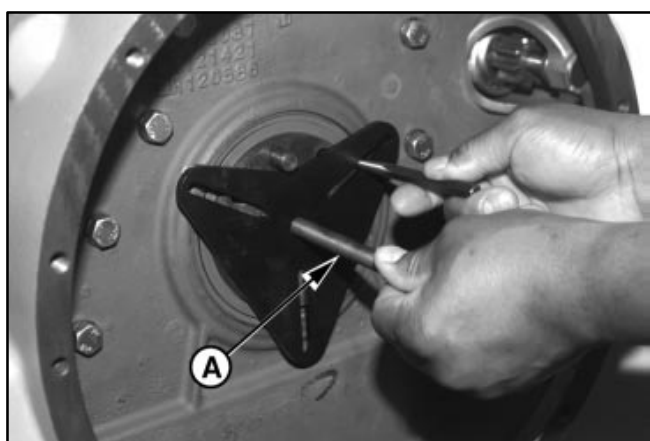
MARKING EXTRACTION SCREW LOCATIONS
